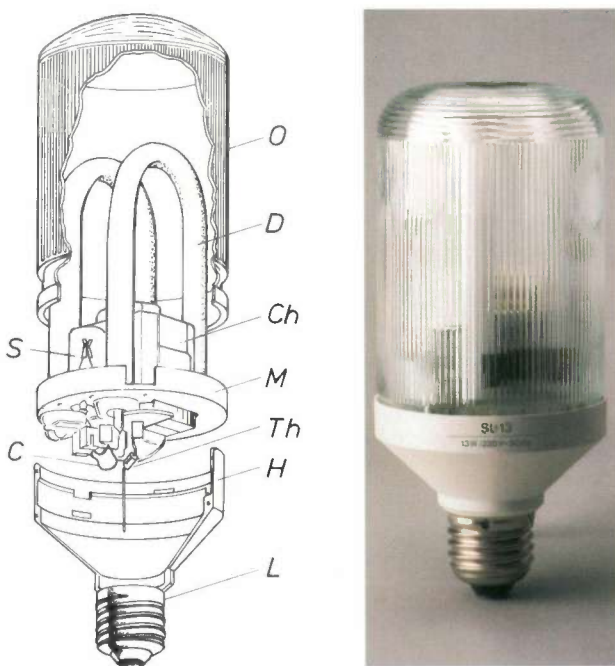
Exploded view and photograph of an SL* lamp. Ballast, starter and the folded discharge tube *D* are integrated in a single unit. *O* outer bulb. *Ch* choke. *S* starter. *M* mounting plate. *Th* thermal cut-out. *C* capacitor. *H* housing. The lamp cap *L* is the same as in conventional incandescent lamps, so that the same fitting can be used.
